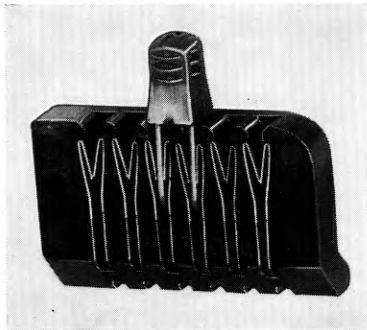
SINGLE TEST-JACK MOULDING SHOWING CONTACT SPRINGS
